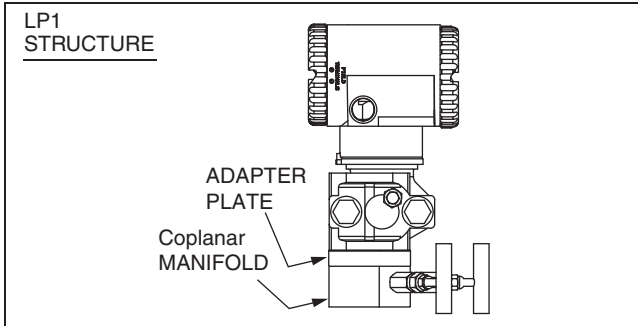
LP1 Shown Mounted to a Coplanar Manifold using an Optional Intermediate Adapter Plate
